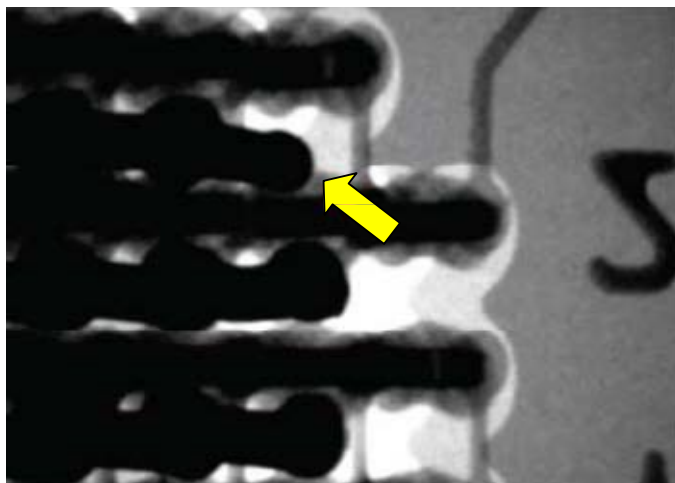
X-radiograph of CGA mounted on PCB showing insufficient solder: Reject
